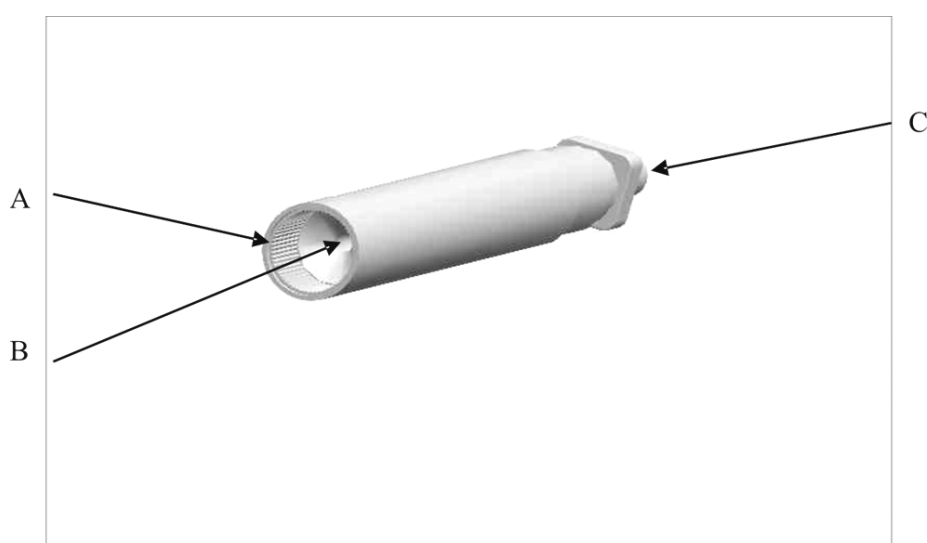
Reactor details. (A) reactor chamber, (B) access tube and (C) rotary seal.
